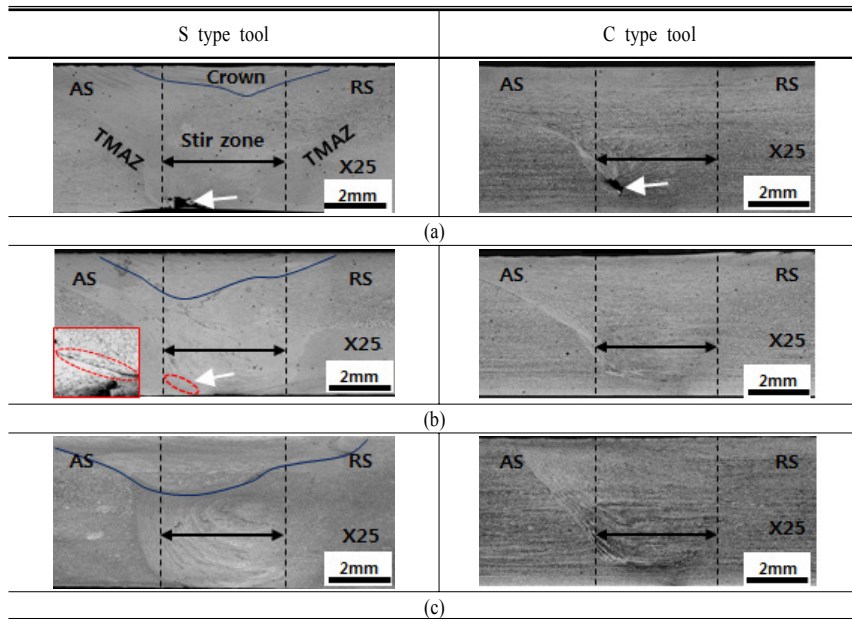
Cross-sectional macrographs of the FSW AZ61 joints
